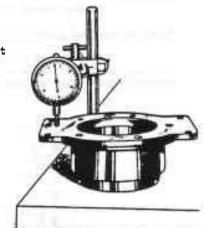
CLOCKING TOP FACE OF SPIGOT PLATE.
